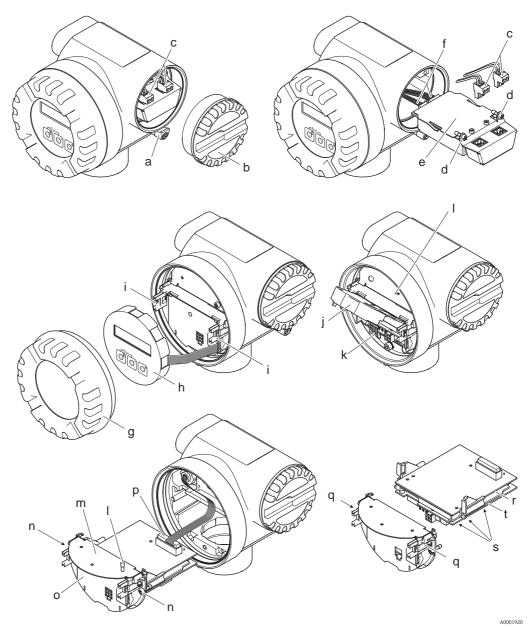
Installing and removing electronics boards Ex-d/XP version
